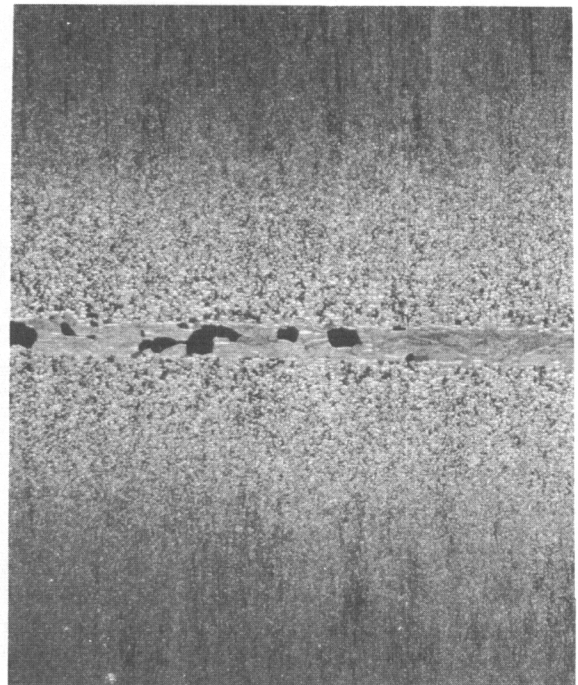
Tungsten Weld Bead; Etched;
